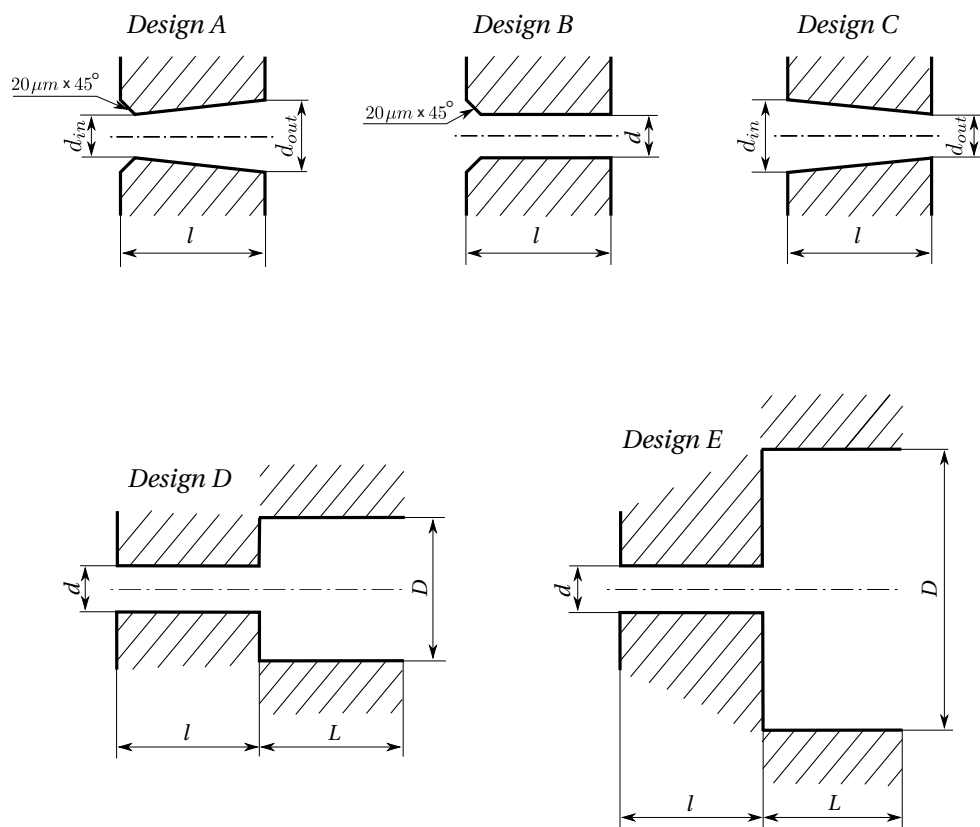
Sketches of generic throttle designs. Designs D and E feature a sharp-edged cylindrical throttle and a step-hole mounted on top of it.
